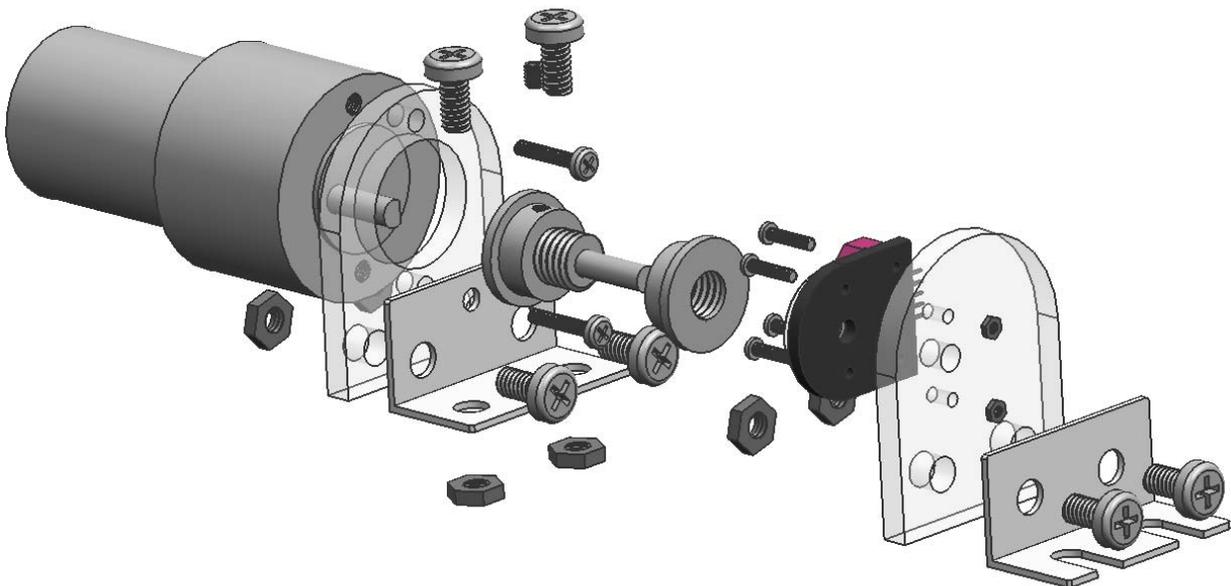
Exploded view of the motor/encoder assembly with two-part pulley.
